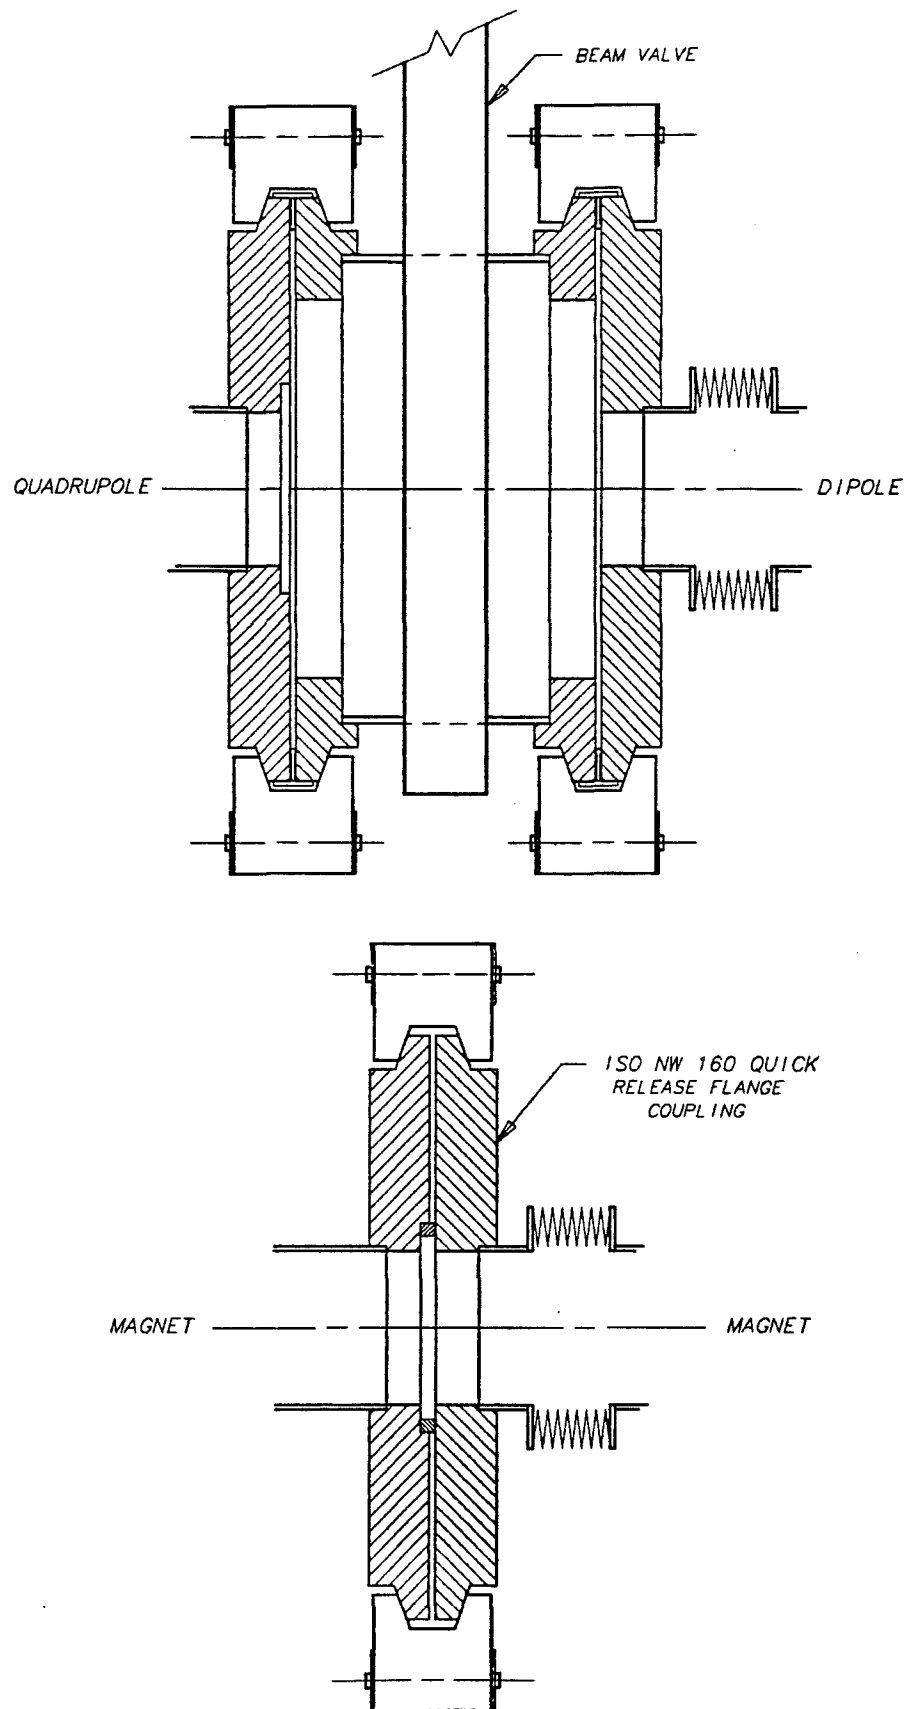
Beam Valve and Beam Pipe Flanges
